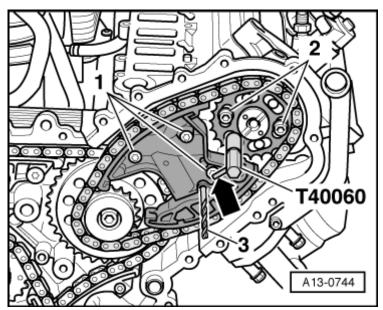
Identifying Left Camshaft Timing Chain, Camshaft Chain Sprocket, Guide Rail And Tensioning Rail
